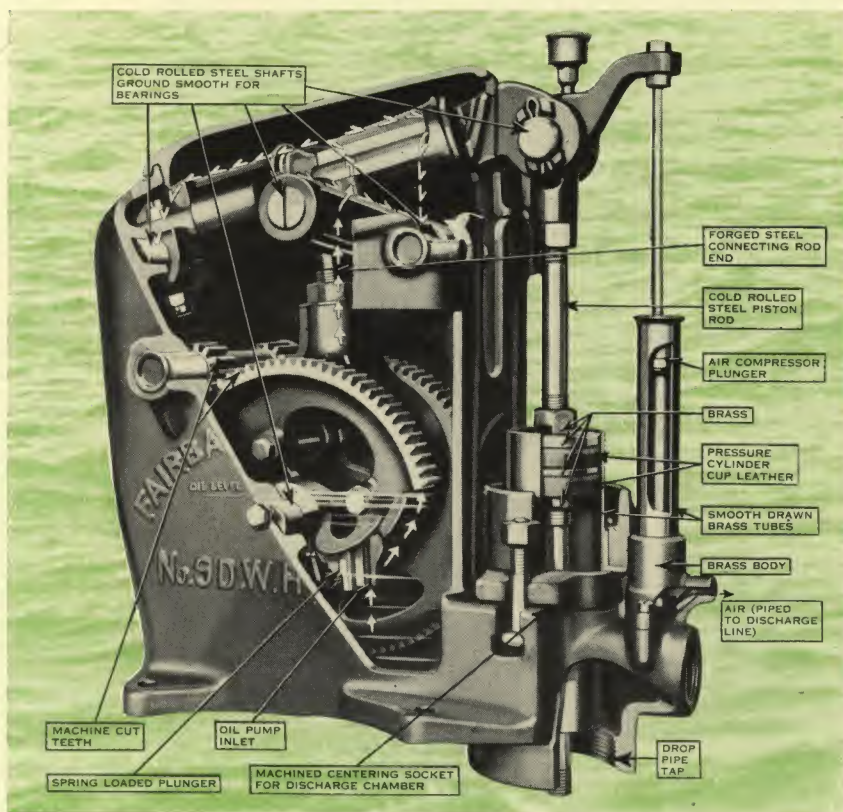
Cross sectional view of Fairbanks-Morse Type "B" Deep Well Pump Head, showing internal mechanism and oiling system.
